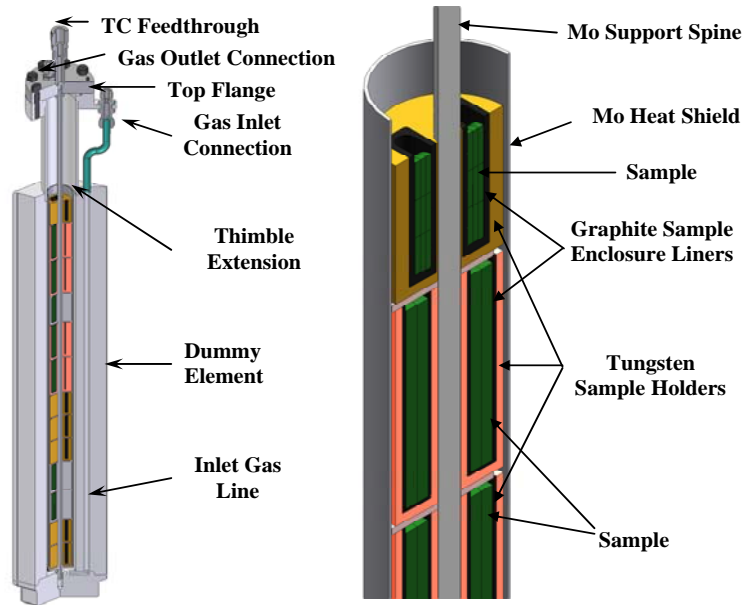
Cutaway views of a solid model of the complete in-core test section and a close-up of individual sample modules.
